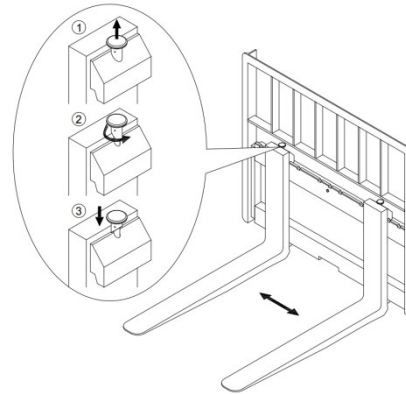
Schematic diagram of pallet fork distance adjustment
